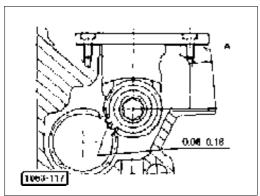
Installing engine governor control assembly into the cylinder block.
